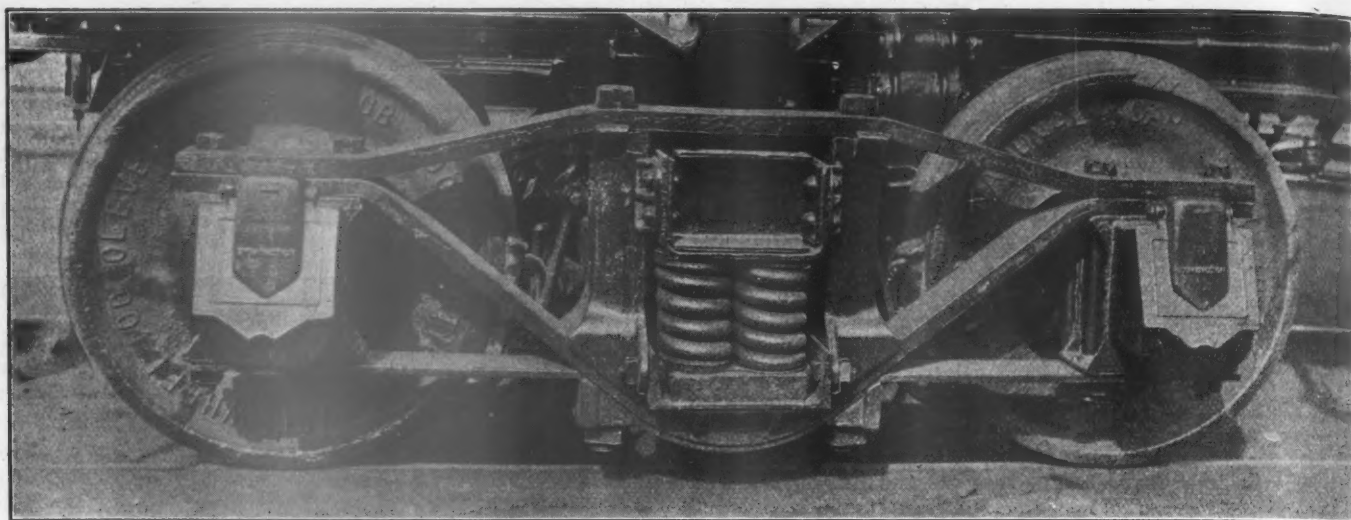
Fifty-ton Truck with Improved Arch Bar Side Frame
